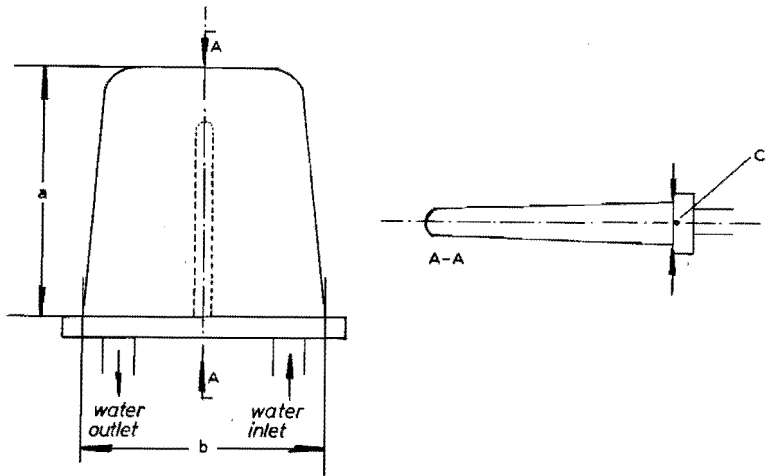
The flat plate cooler. Typical dimensions are:
